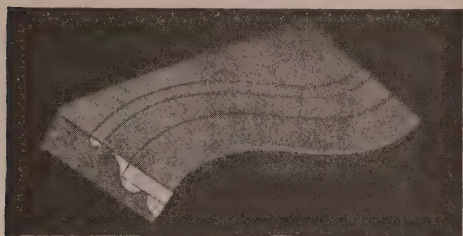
Wood for Curved Moulding, Shaped and Gauged
